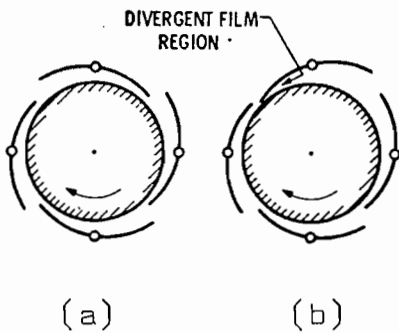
Tilting Pad Journal Bearing; (a) Normal Operation, (b) "Spragged" Condition.
